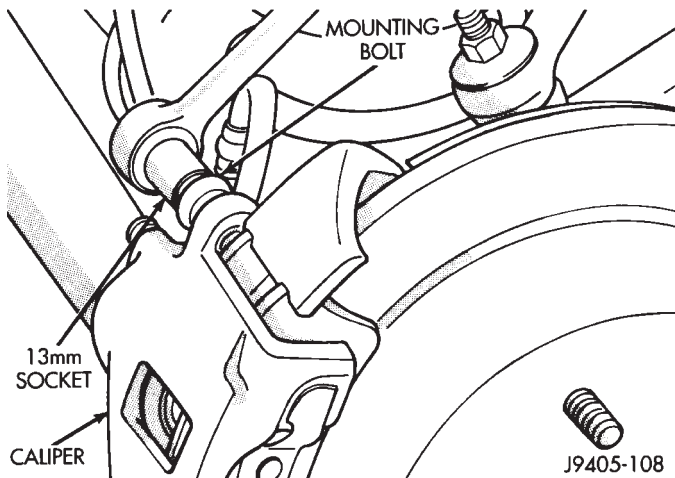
Rear Caliper Mounting Bolt Removal/Installation
